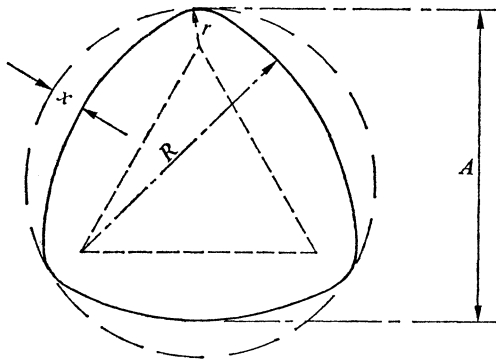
Exaggerated drawing of a three-lobed grinding fault
